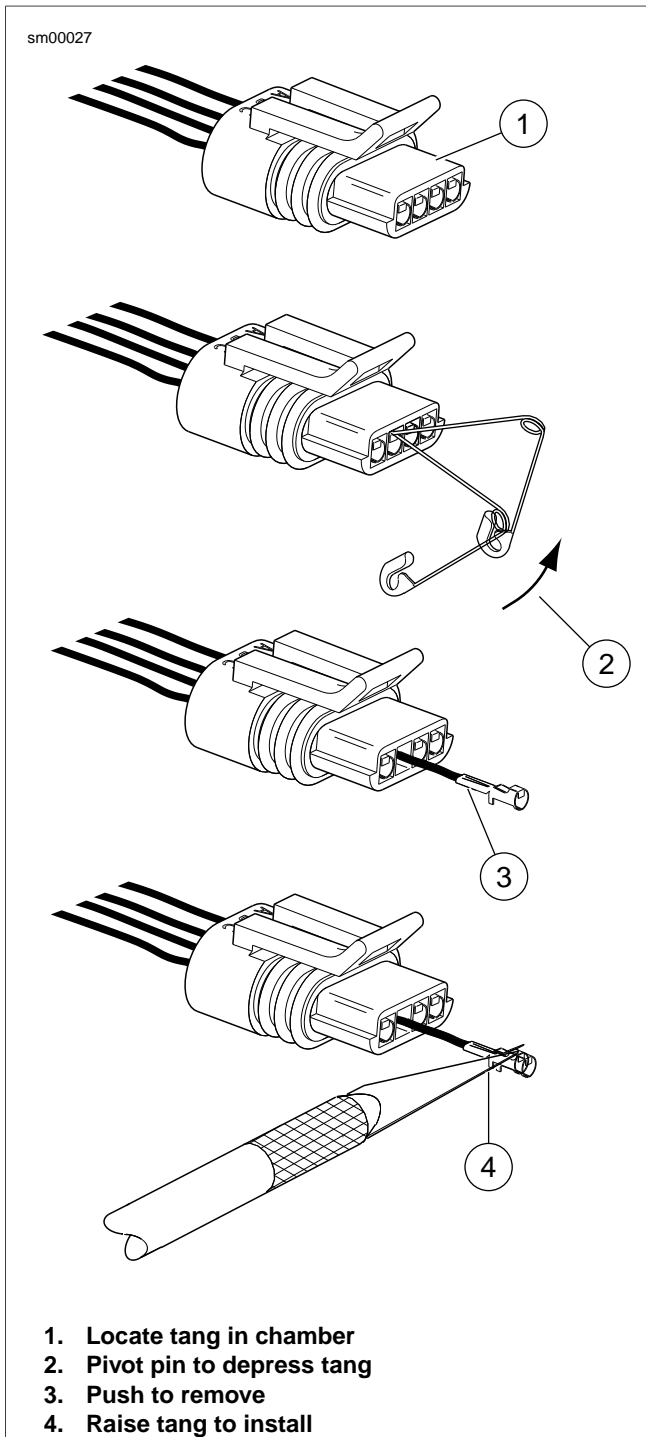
150 Metri-Pack Connector: Pull-to-Seat
